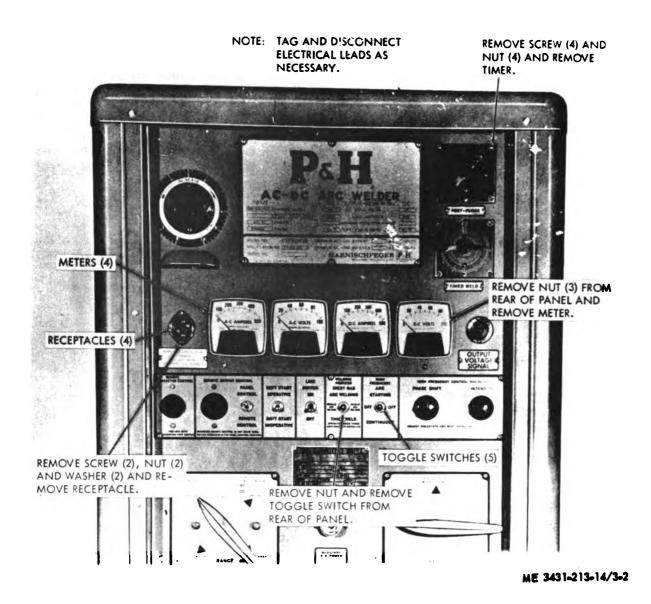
Upper control panel components, removal and installation, Model DAR-\$00HFSG.
